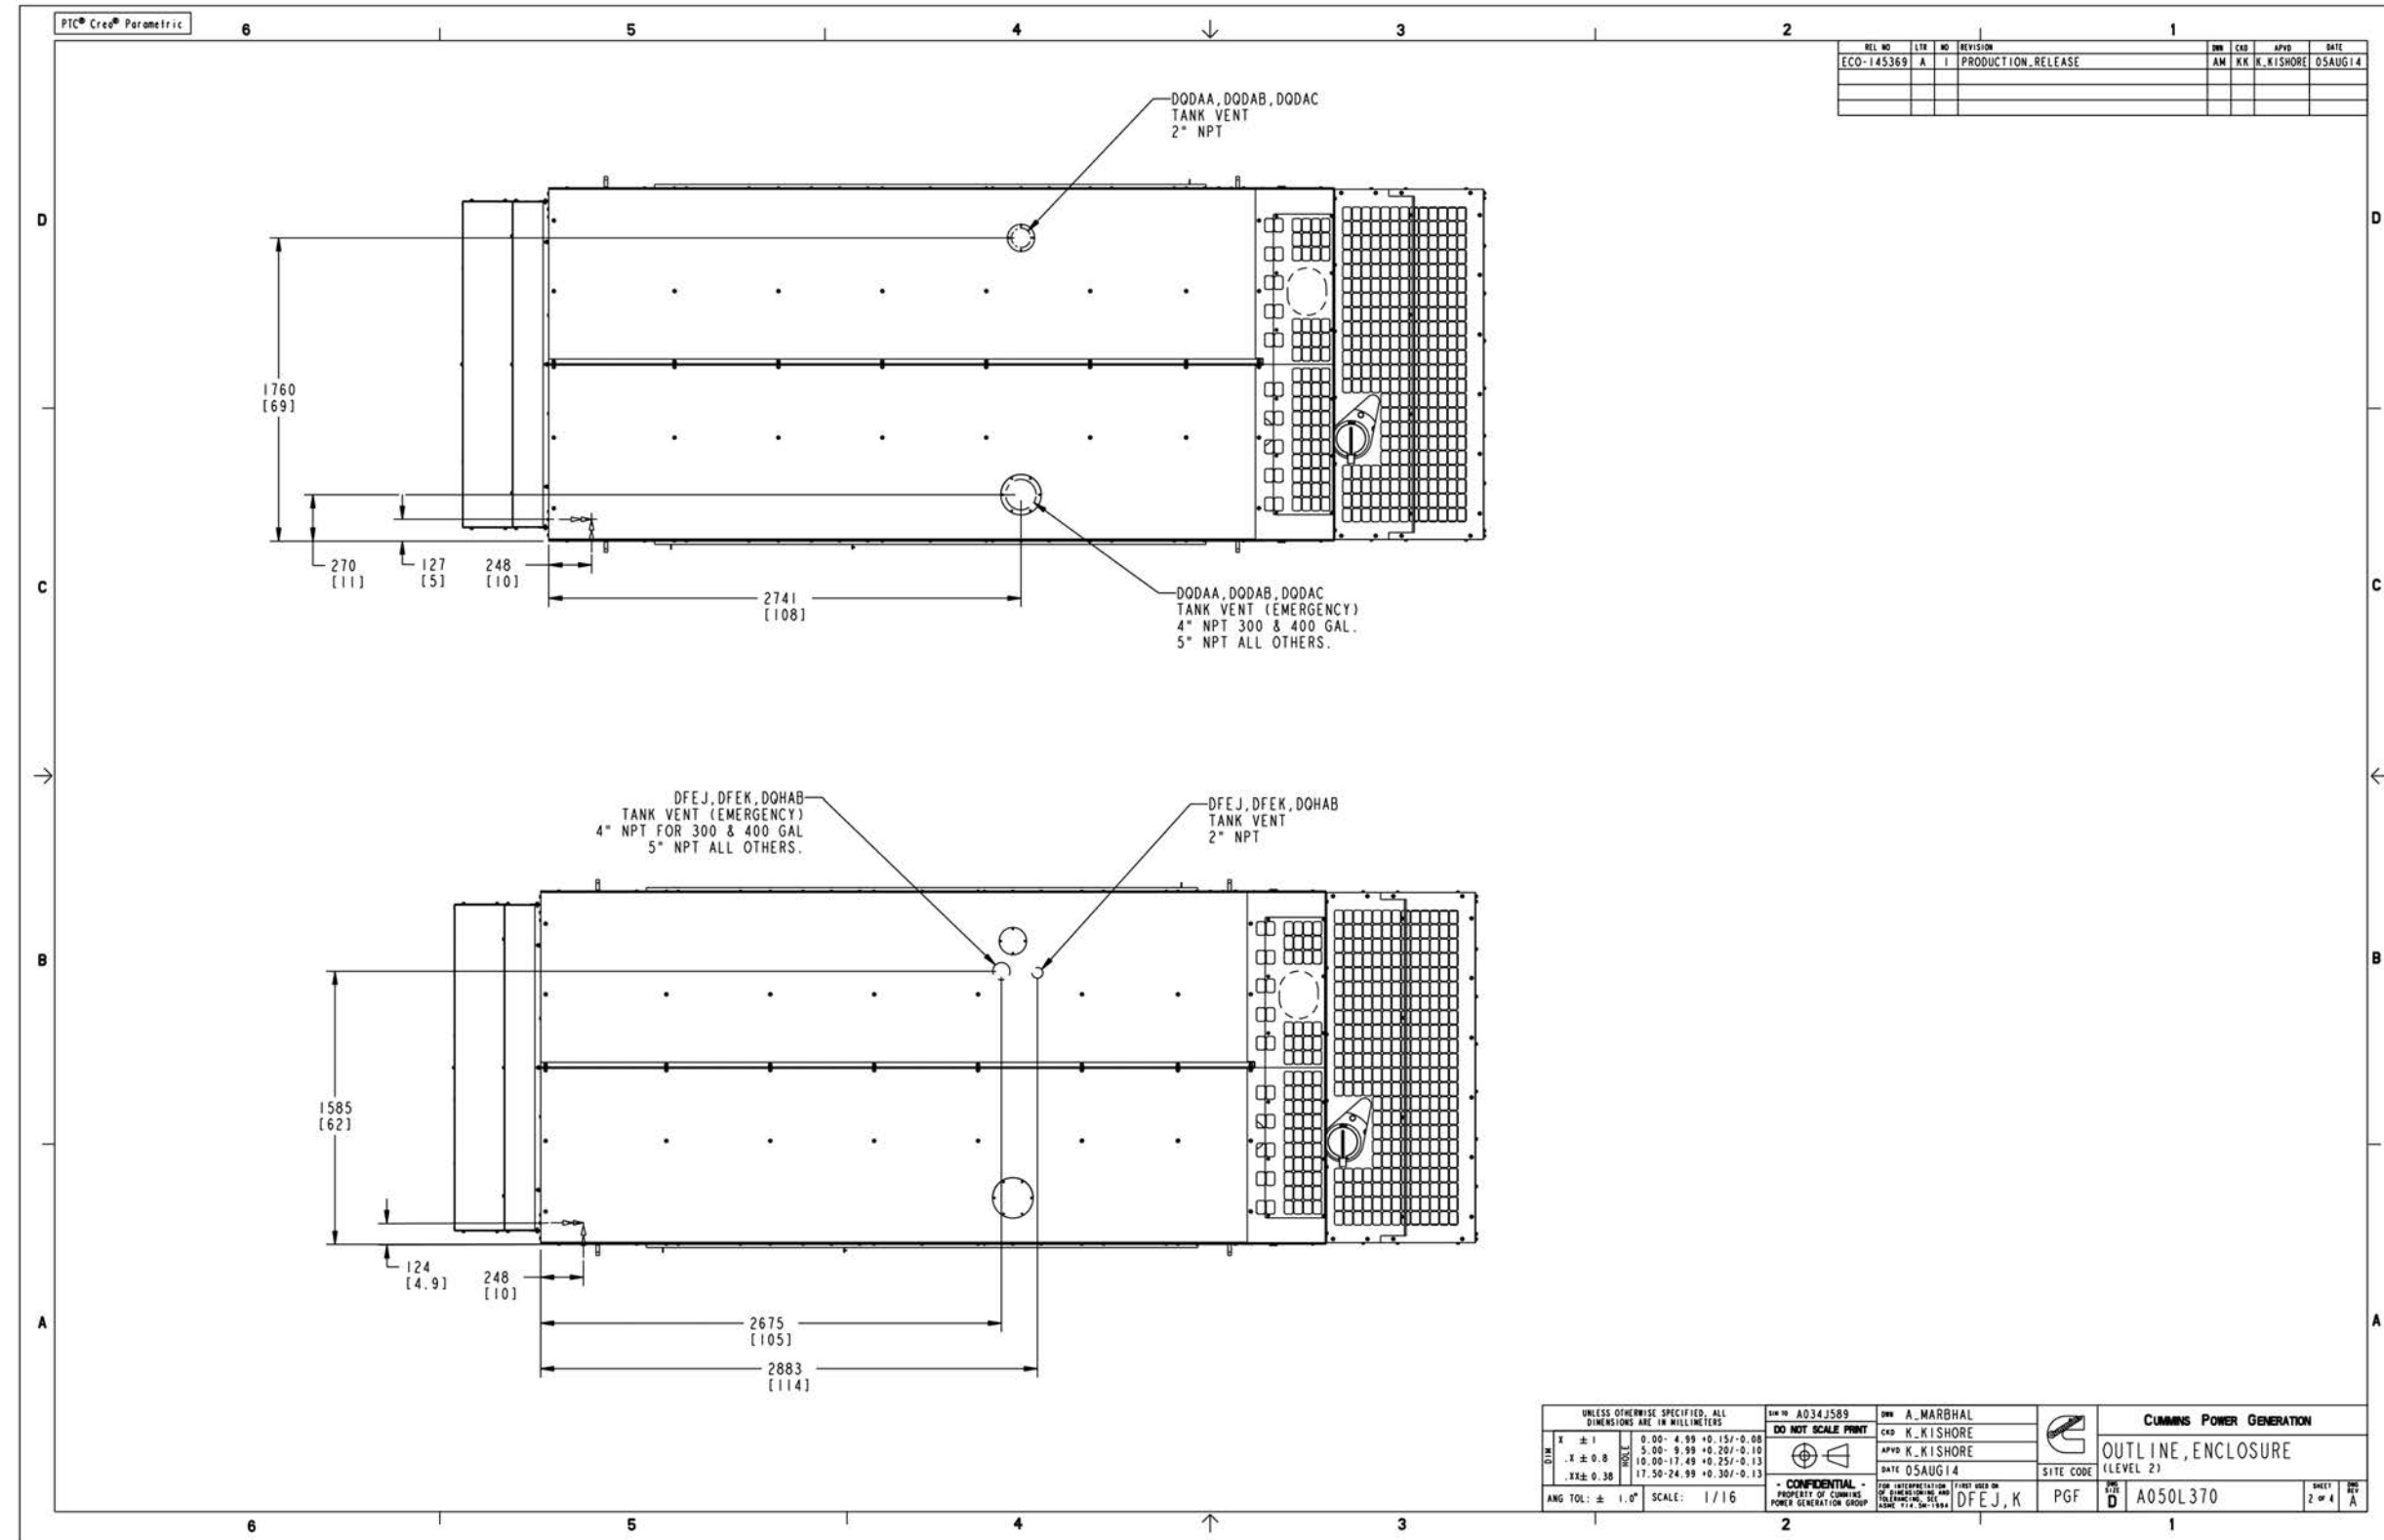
ENCLOSURE OUTLINE DRAWING (F202, F205, F206, F208, F209) (SHEET 2)
